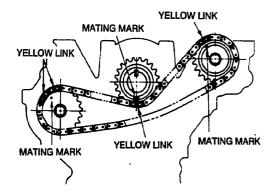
PROPER SPROCKET AND CHAIN ALIGNMENT
